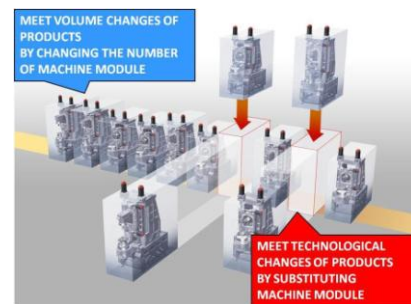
Examples of reconfigurable system solution composed of small size machine tools (courtesy of Mori Seiki).
